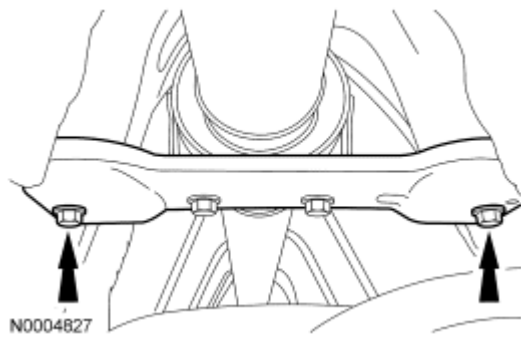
Identifying Driveshaft Cross Brace Mounting Bolts
